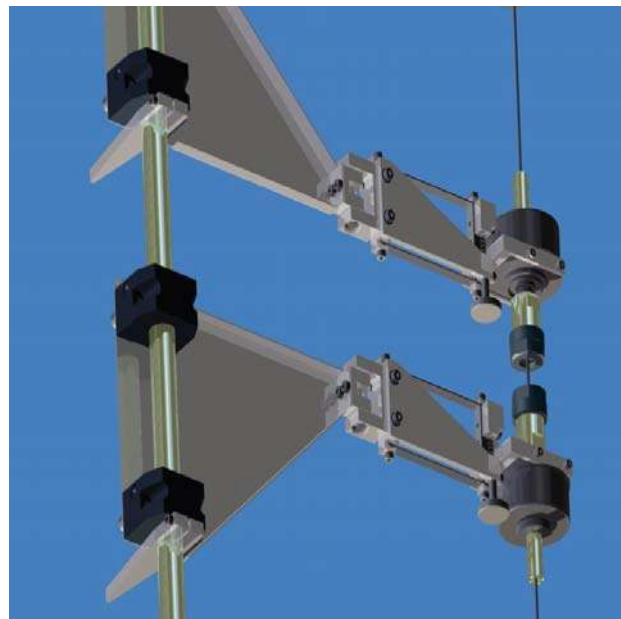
3-D-Mechanical drawing of a developed rig determining the shearing elongation
